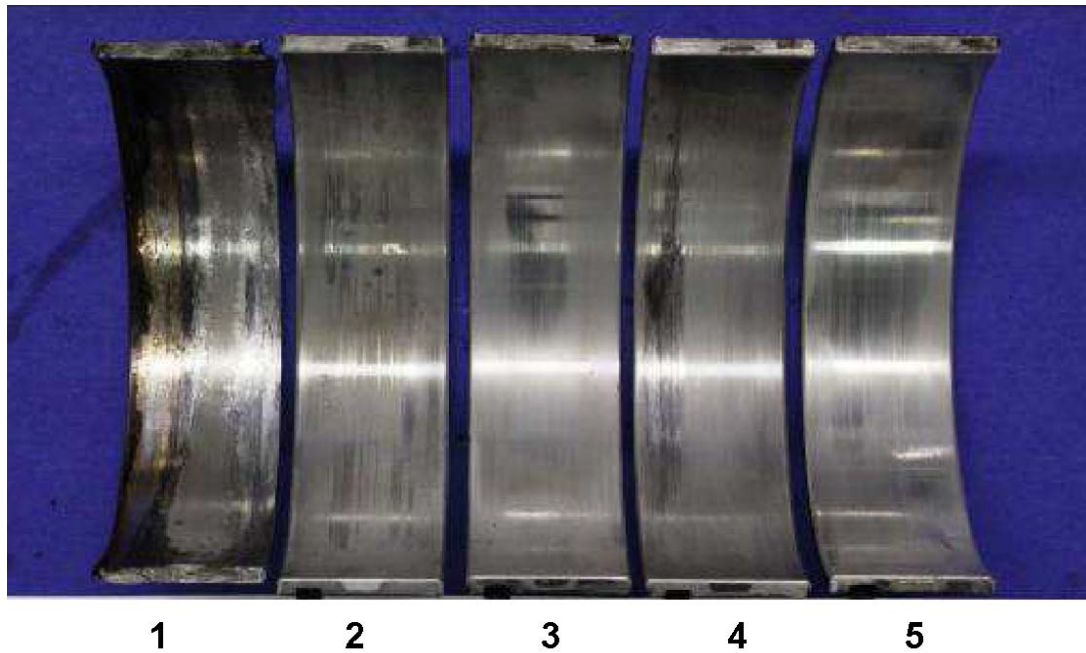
Lower crankshaft bearings (1 is the position closest to the belt pulley)
